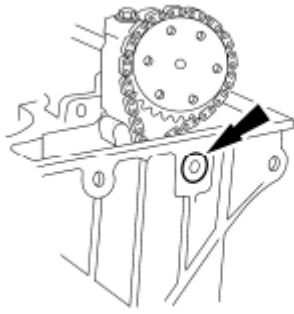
Identifying LH Camshaft Sprocket Bolt
